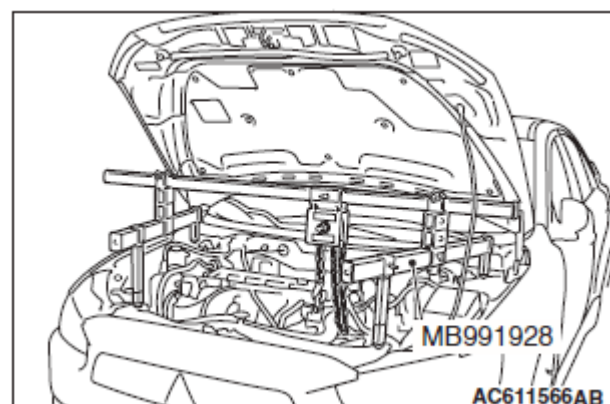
Supporting Engine Assembly Using Special Tool MB991928
